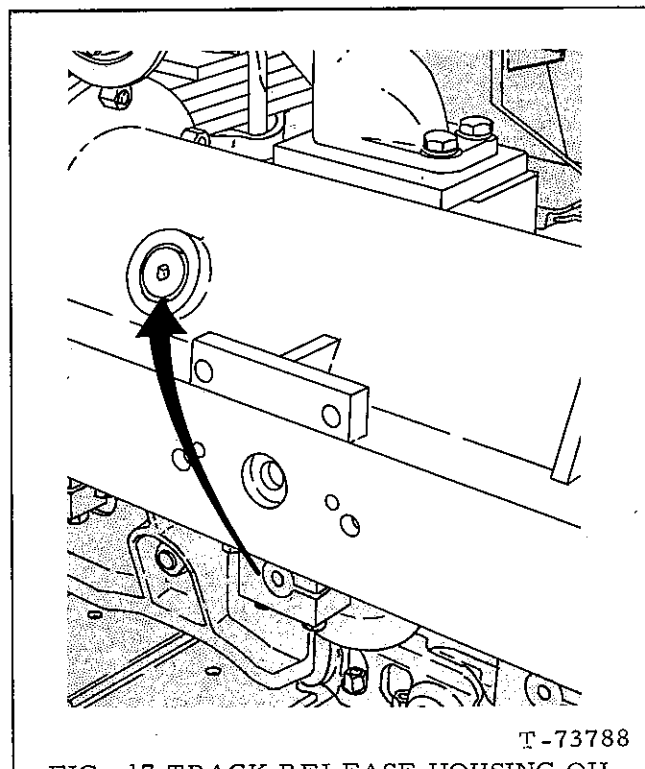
TRACK RELEASE HOUSING OIL LEVEL AND FILLER PLUG
